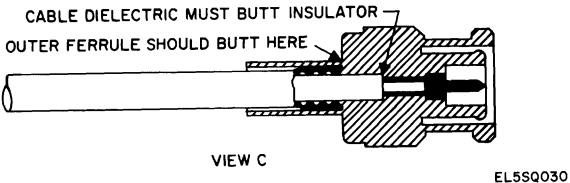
Connector Assembly, Cable 1AIW5P2 through P5.
